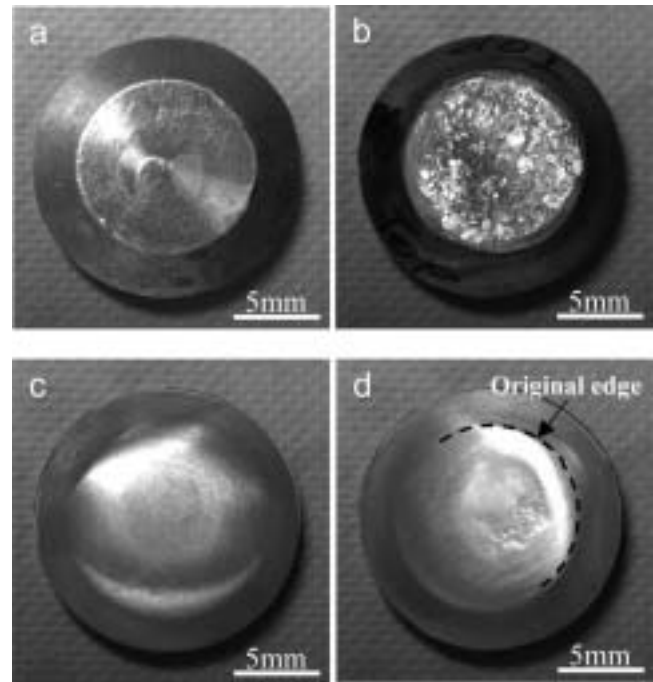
Surface appearances of (a) a new electrode, and used electrodes after 2000 welds; (b) without periodic cleaning; (c) with cleaning every 20 welds; and (d) with cleaning every 50 welds.
